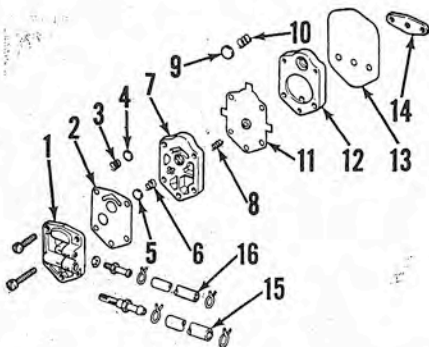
Exploded view of fuel pump typical of the type used on some late motors.
